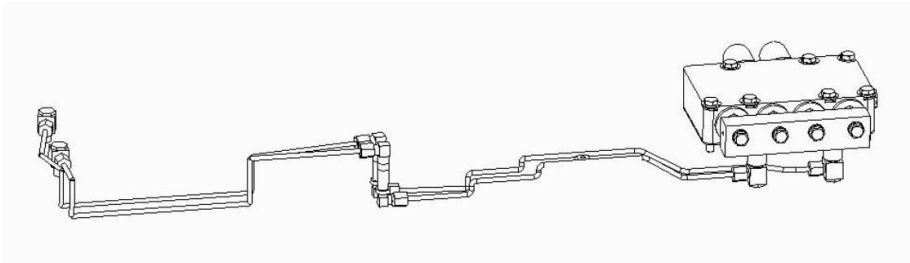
Engine oil distribution valve housing for steering power and oil delivery pipe.
